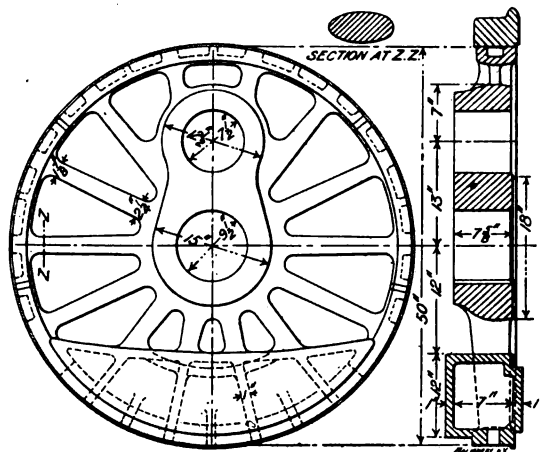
Cast Steel Driving Wheel Center for Consolidation Locomotive
